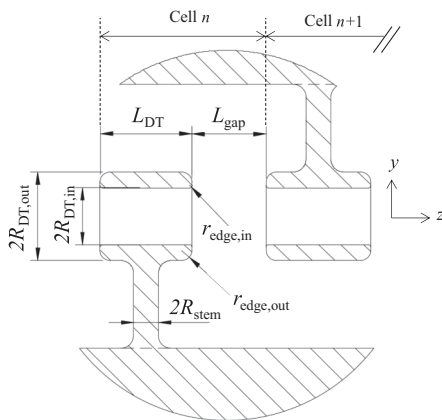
Enlarged view of the drift tube and stem on the center plate.
